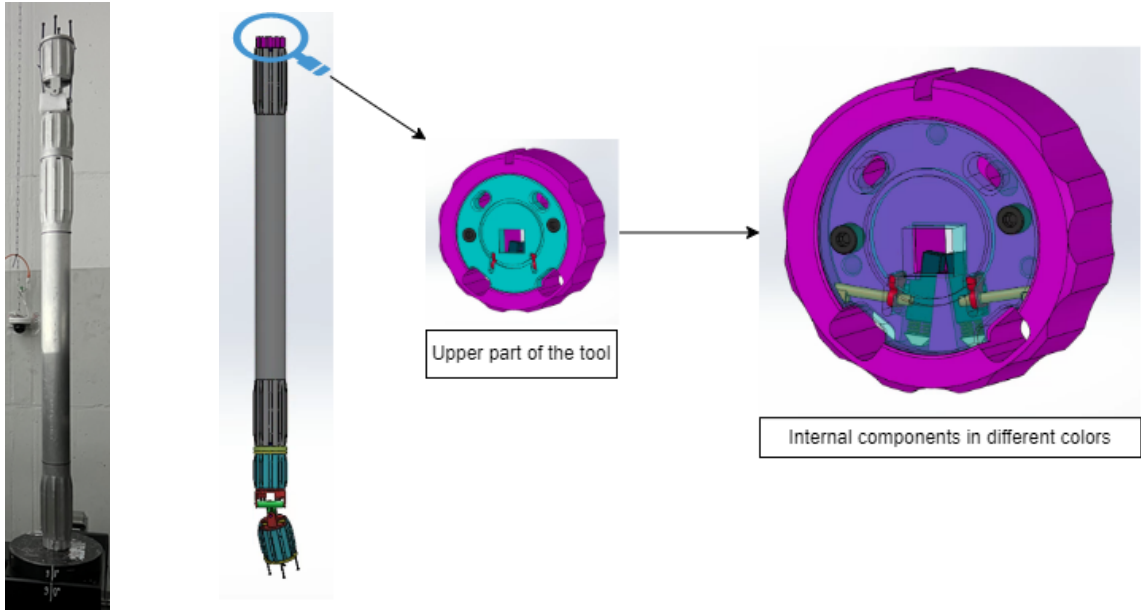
Example of an NPP inspection tool (left) and corresponding CAD image of the tool showing internal components (right).
